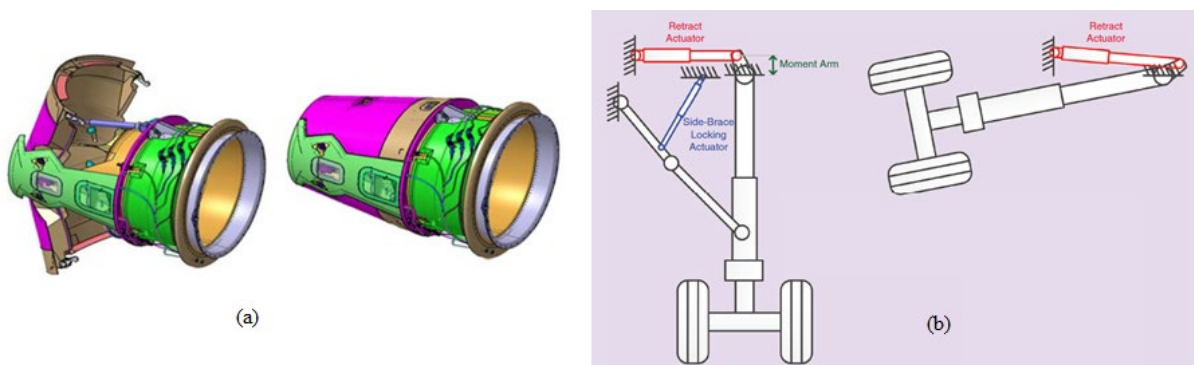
(a) the opening of thrust reverser [4] (b) Extension and retraction of landing gear [3]
